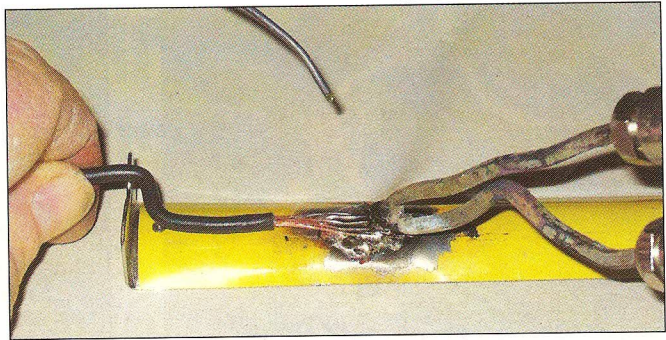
Soldering the #14 AWG stranded hookup wire to bare metal area.
